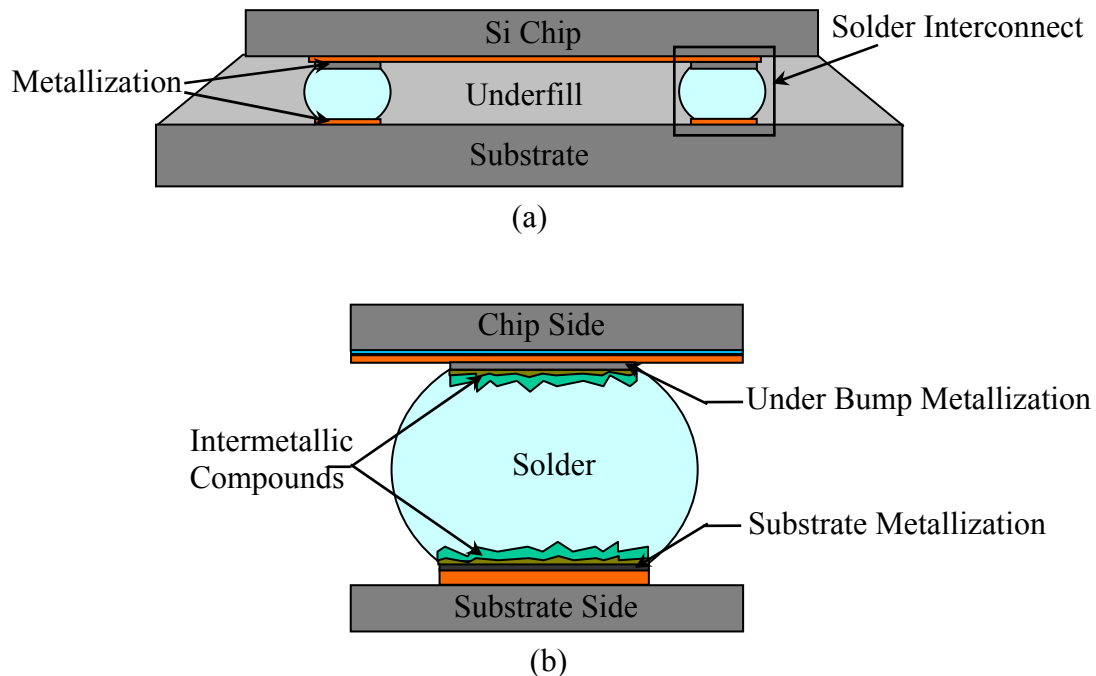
Schematic of typical (a) solder flip chip package and (b) solder interconnect.
